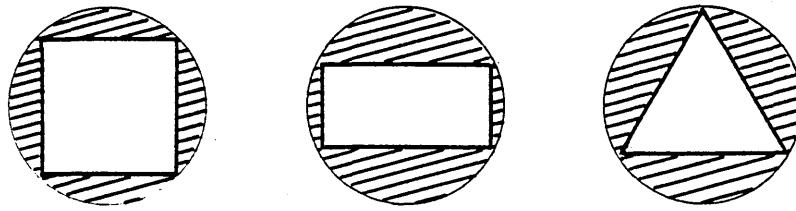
Prismatic testpieces, machined from the centre of cylindrical billets (scale 1:1)
